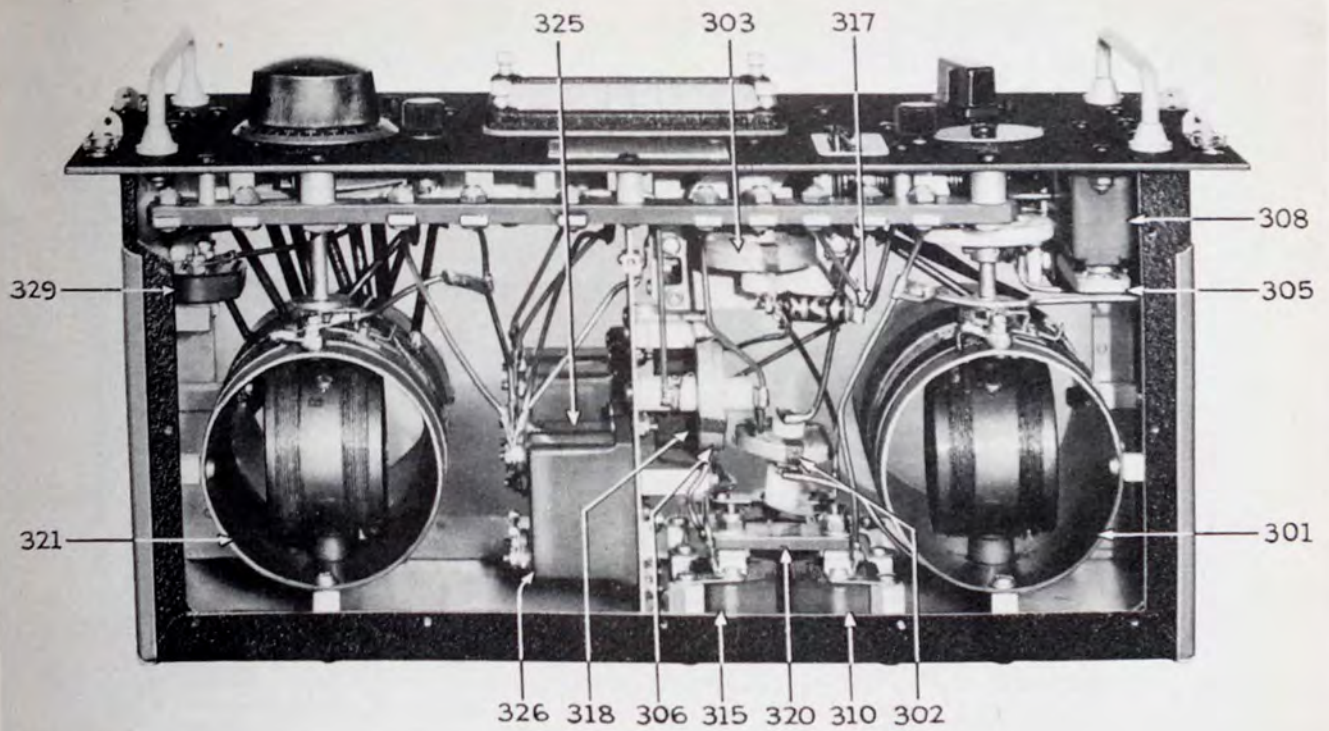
TRANSMITTER TUNING UNIT TU-3-B, TOP VIEW, COVER REMOVED
